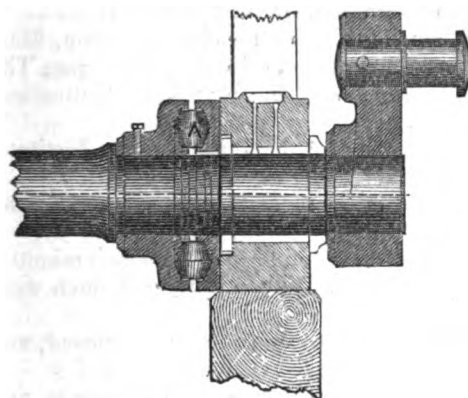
, represents the crank shaft of a propeller, with the box bearing against the pillar block ; the rollers A, revolving with the shaft.
